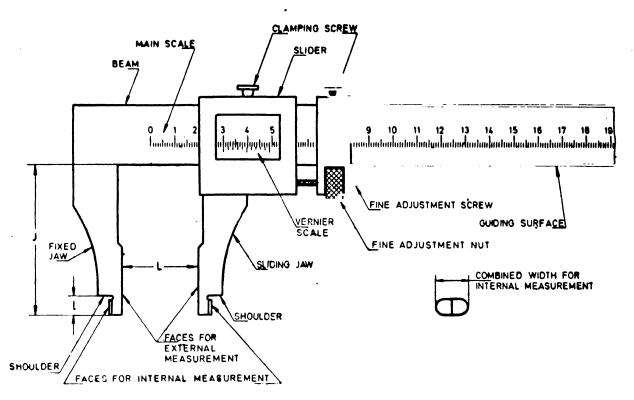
NOMENCLATURE AND DIMENSIONS FOR TYPE B VERNIER CALIPERS
